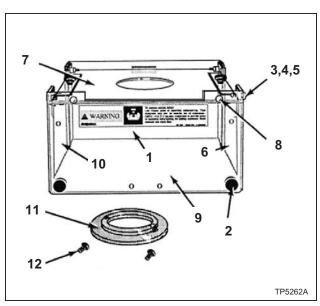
Figure I.I - Spindle Guard Assembly (R8 Spindle)
